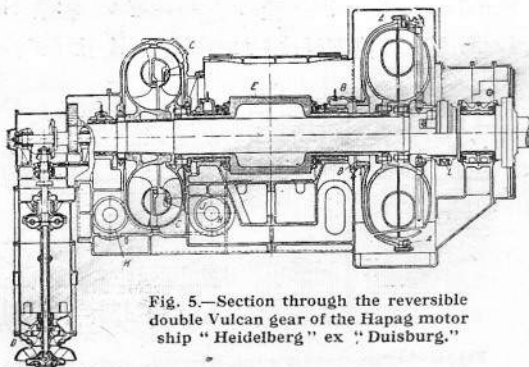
Section through the reversible double Vulcan gear of the Hapag motor ship "Heidelberg" ex "Duisburg."
